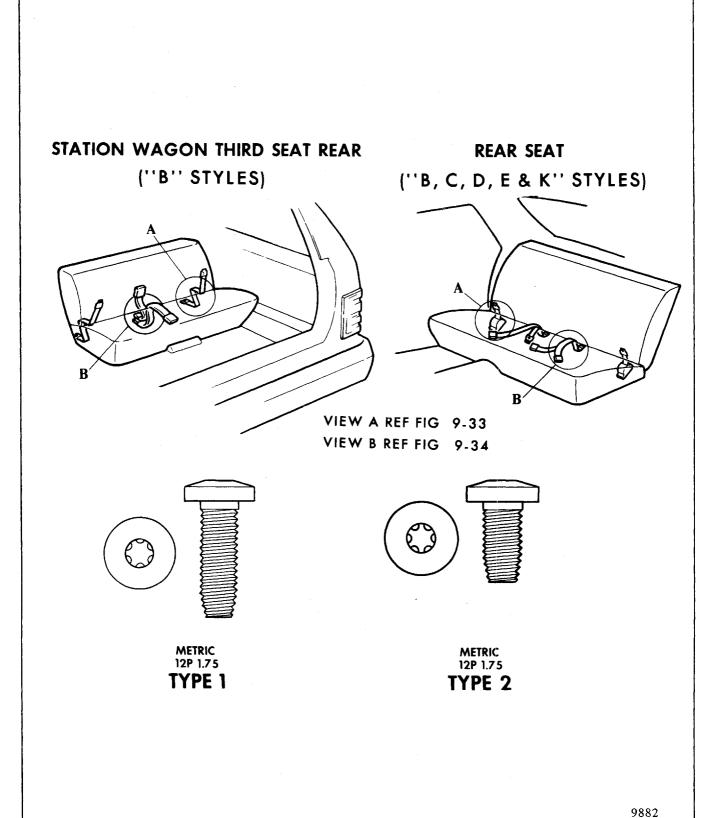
Rear Seat Lap Belt Attaching Locations and Bolts (Metric) B,C,D,E and K Styles
